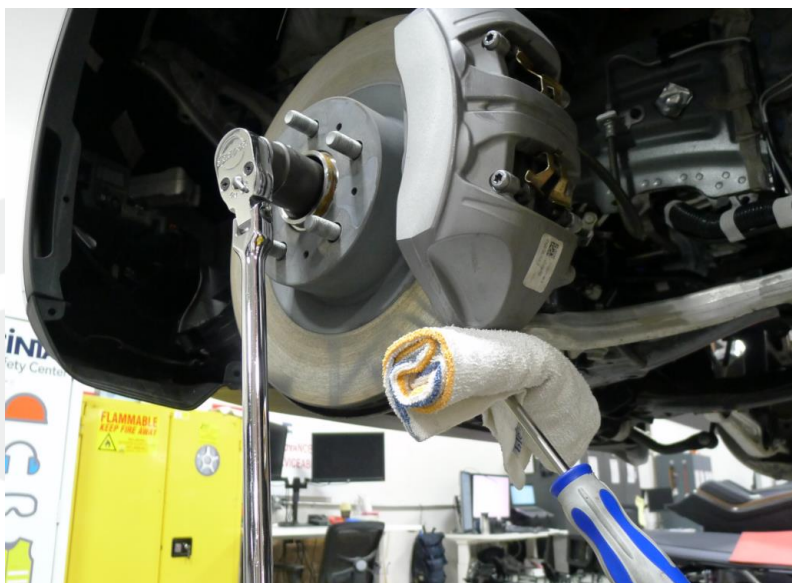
LH brakes shown; the screwdriver is positioned *above* RH brake calipers
